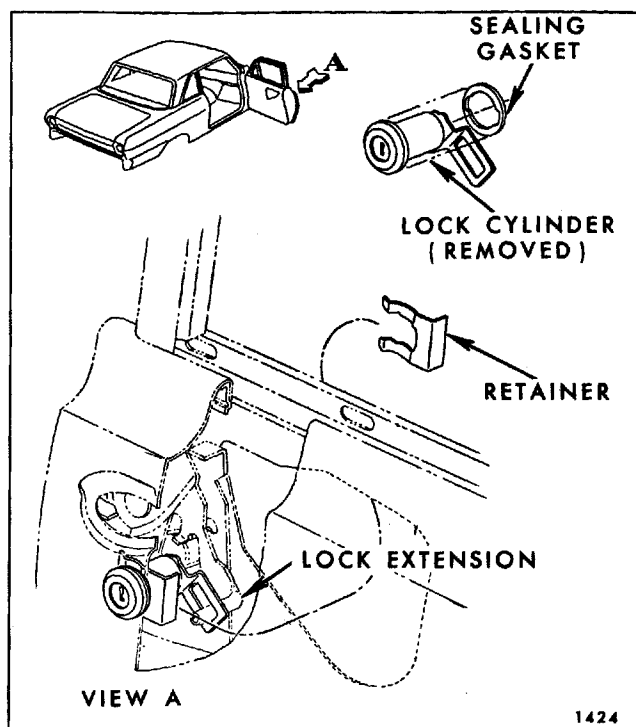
Front Door Lock Cylinder Removal - "X" Styles Shown - Others Similar
